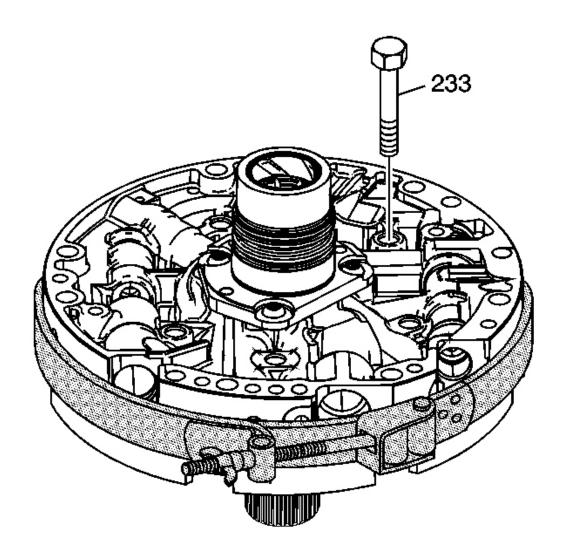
View Of Oil Pump Cover, Oil Pump Body & Bolts Courtesy of GENERAL MOTORS CORP.
